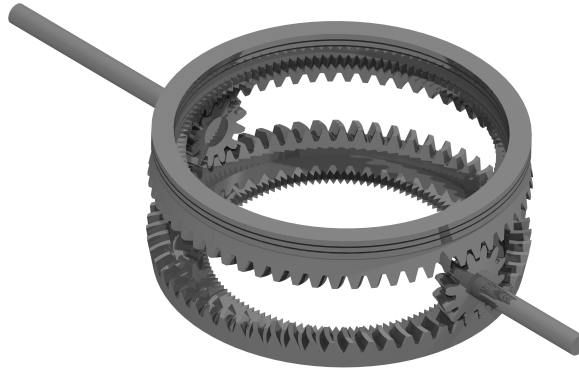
Power Splitting Spiral Bevel Gear Mesh
